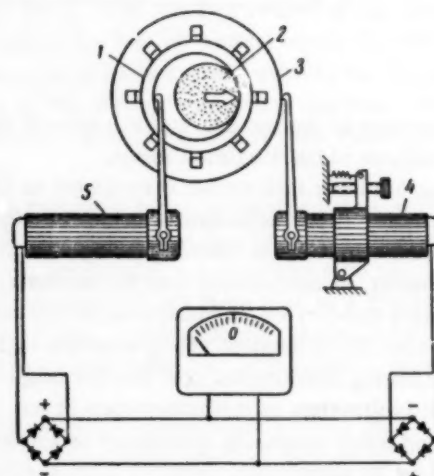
Scheme of a measuring device with two transducers for measuring aperture diameters with automatic compensation of errors from the mandrel being squeezed out of the workpiece by the cutting forces. 1) Ring to be ground; 2) abrasive wheel; 3) face plate; 4) compensating transducer with the controlling device; 5) working transducer.
